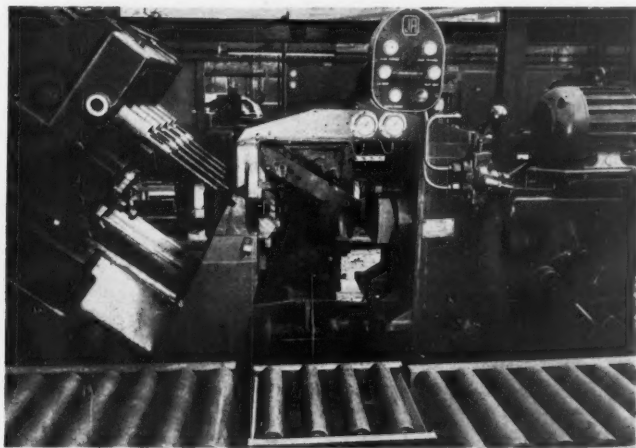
Archdale three-way drilling machine with reciprocating angular head for drilling deep oil holes
